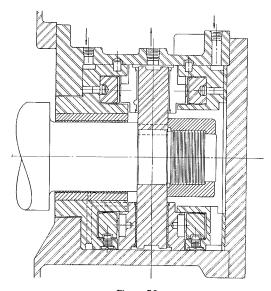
Compact design for thrust and journal bearing at forward end of gear or motor housing. Special base ring functions also as a journal bearing shell.
